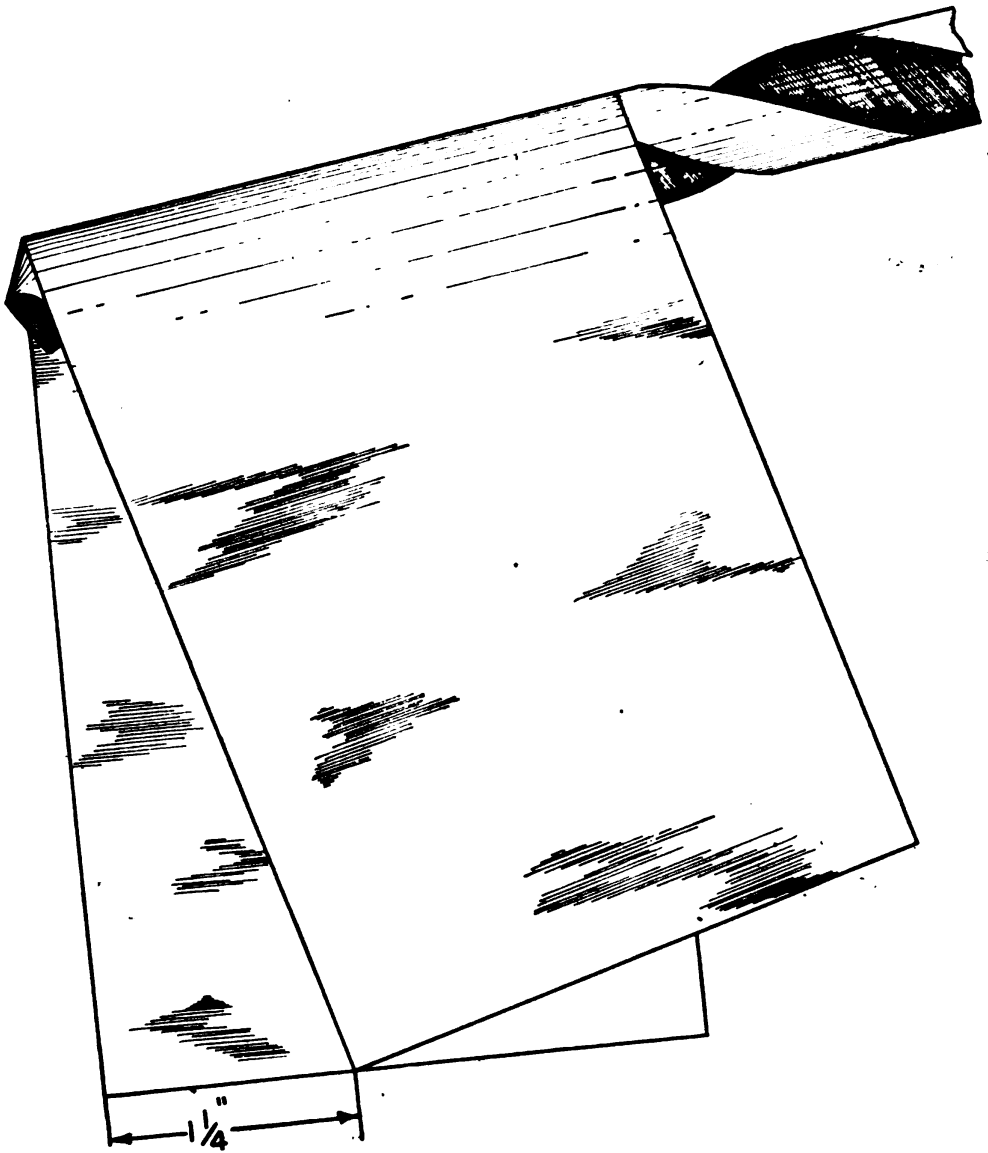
Checking the lip clearance of a drill with a strip of paper.
